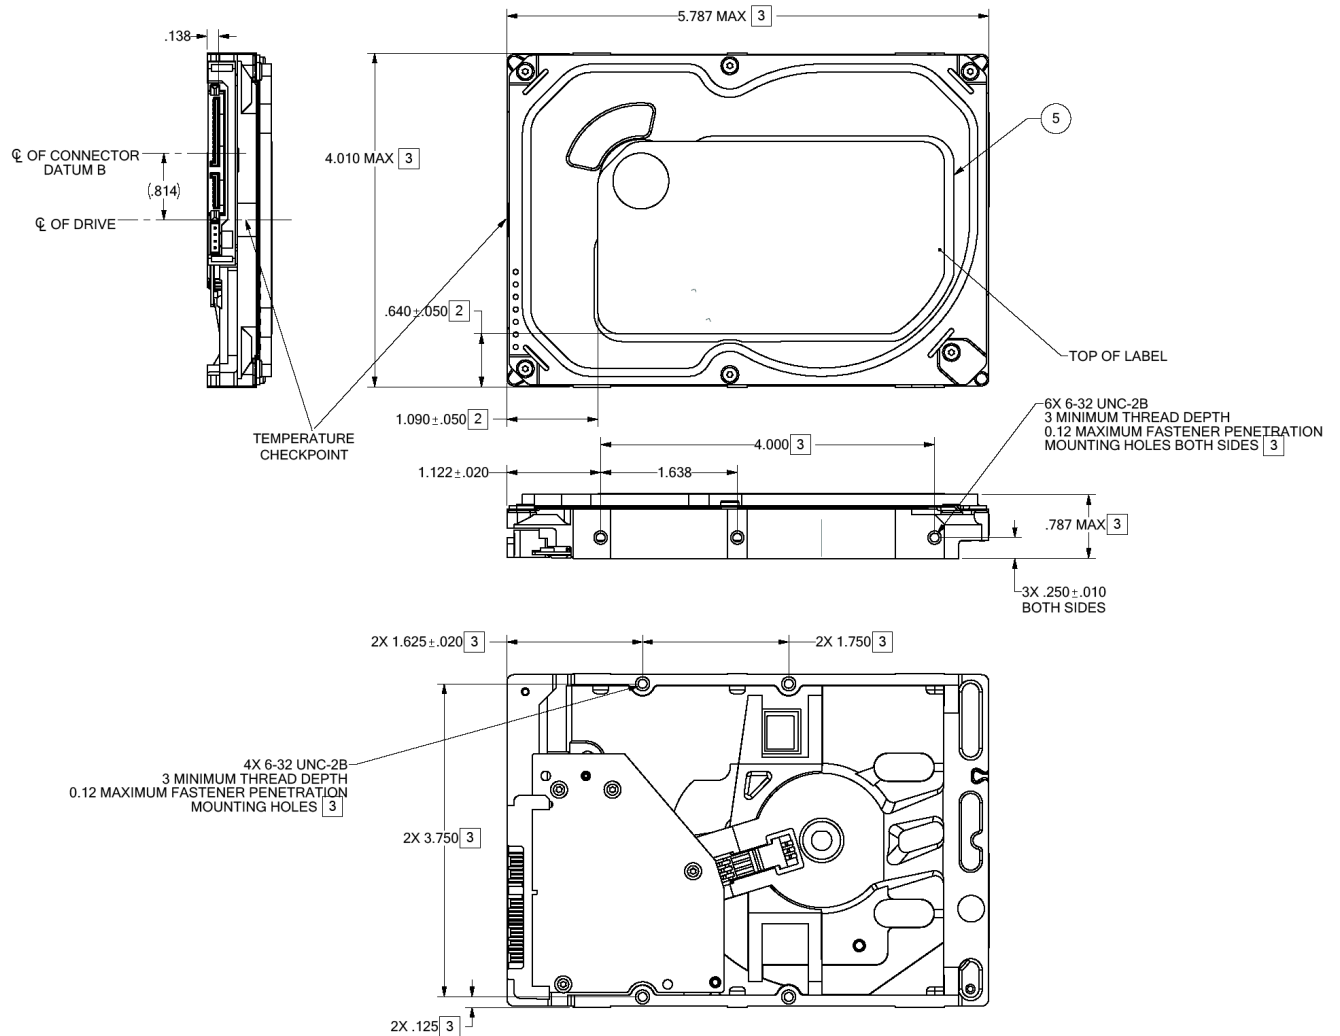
Mounting dimensions (2/3-disk: 2TB to 3TB models)
